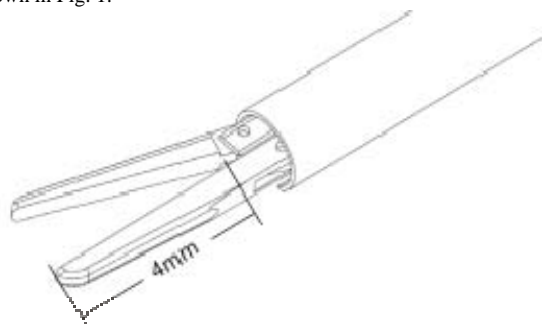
Tip of the guide tube with forceps of the implant gripper deployed. The gripper holds the base of the cochlear implant and inserts it while the stylet hook (not shown) retracts the stylet during electrode array insertion.
